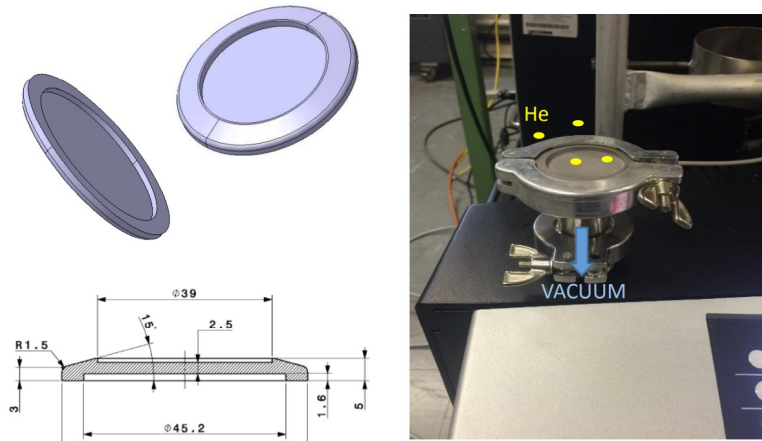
AM ISO-KF type vacuum test membrane 3D model, drawing and test assembly. [42]
